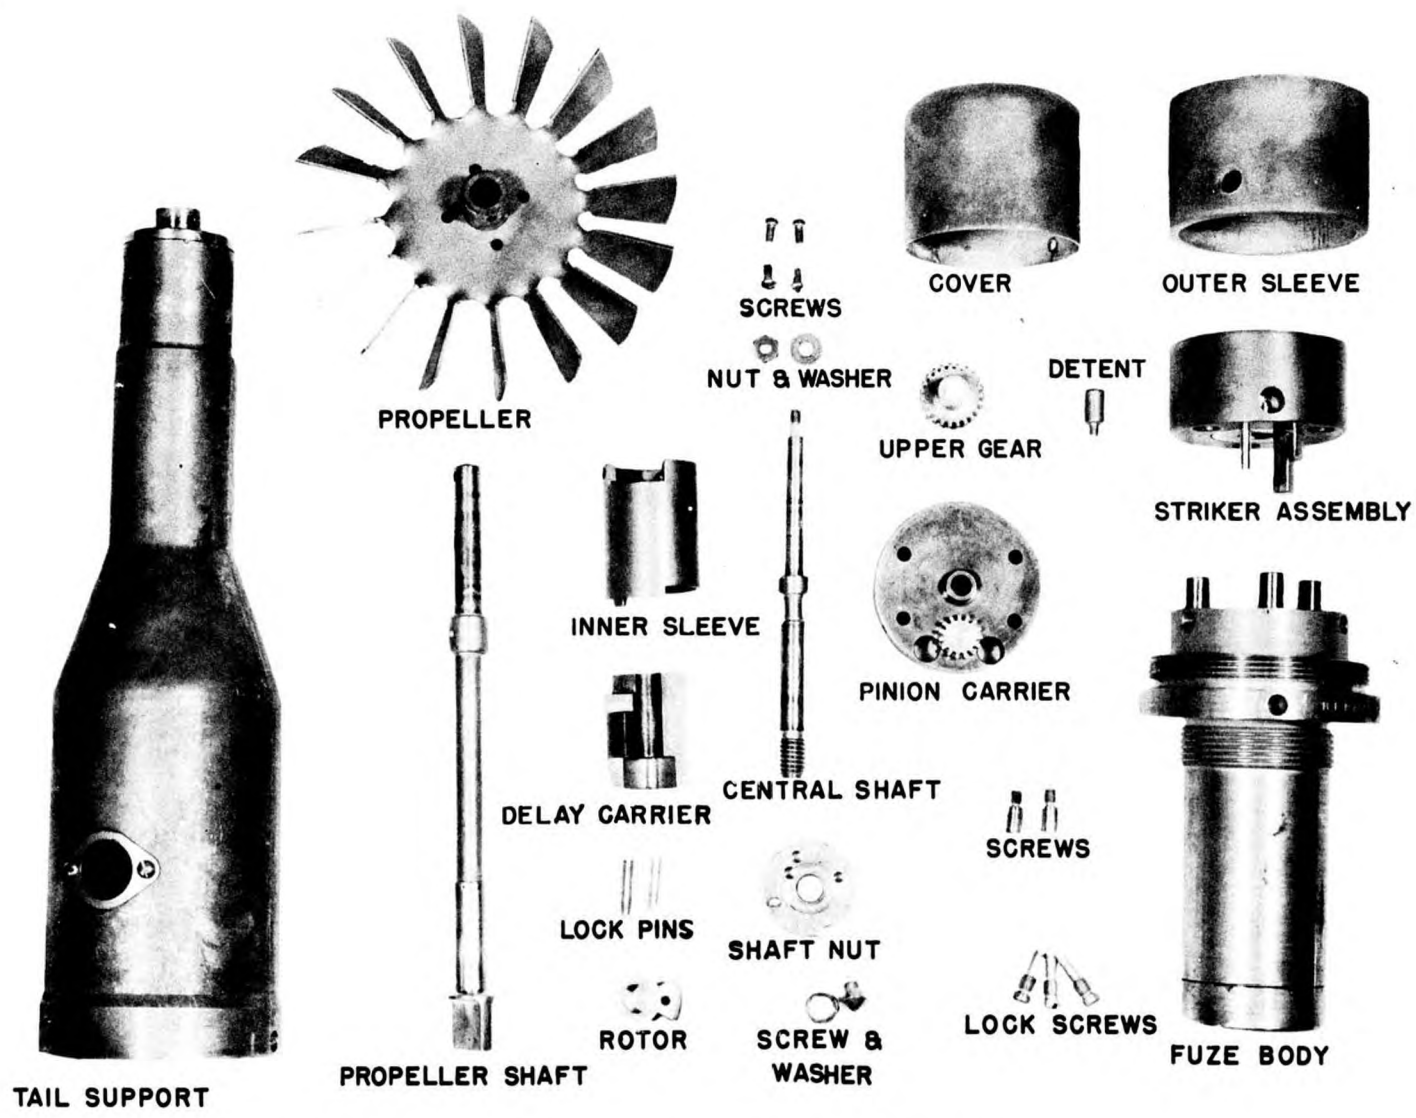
BOMB FUZE MARK 223: DISASSEMBLED PARTS
